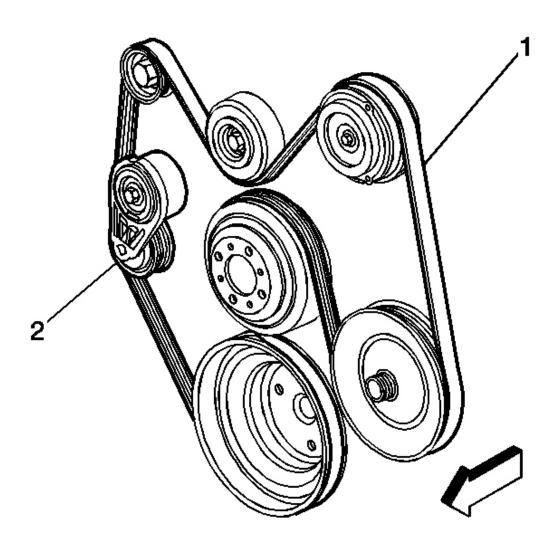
Drive Belt & Tensioner (W/A/C) Courtesy of GENERAL MOTORS CORP.
